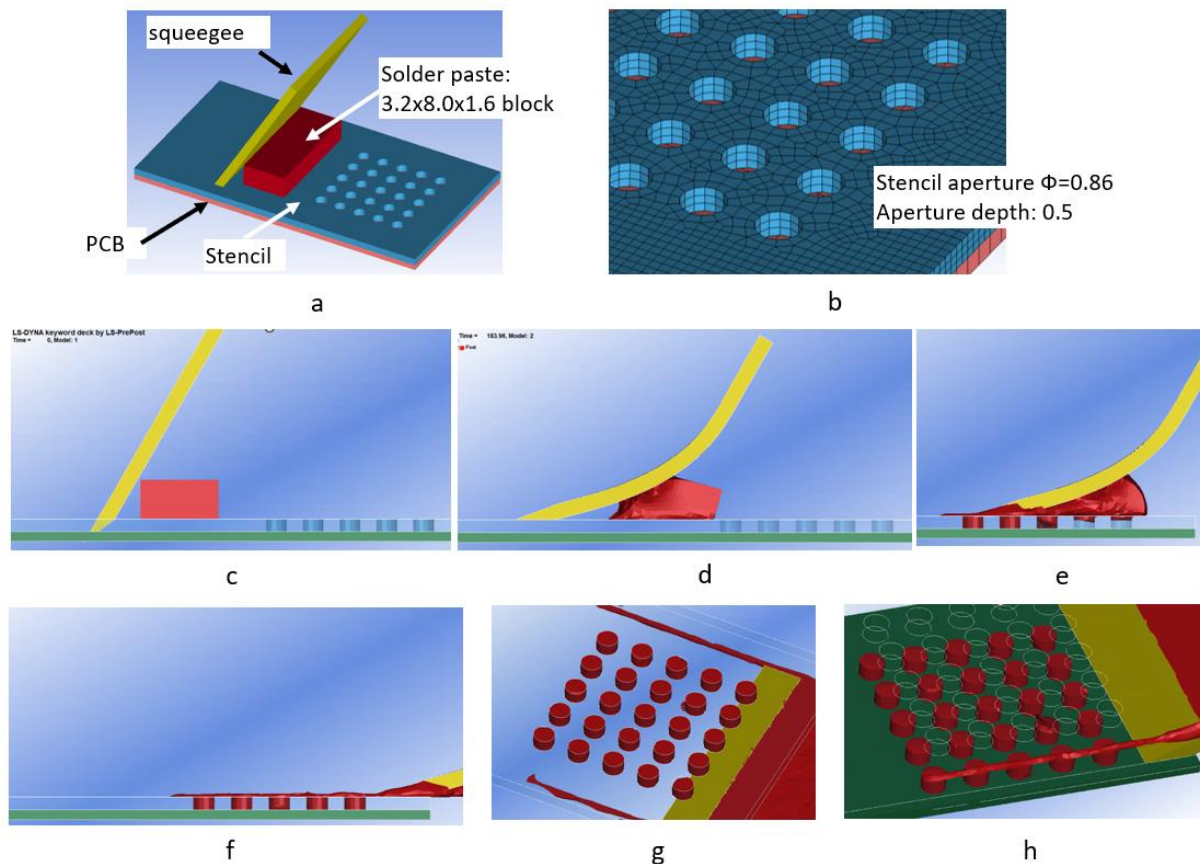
Solder paste printing and stencil removal (units: mm, ms).
